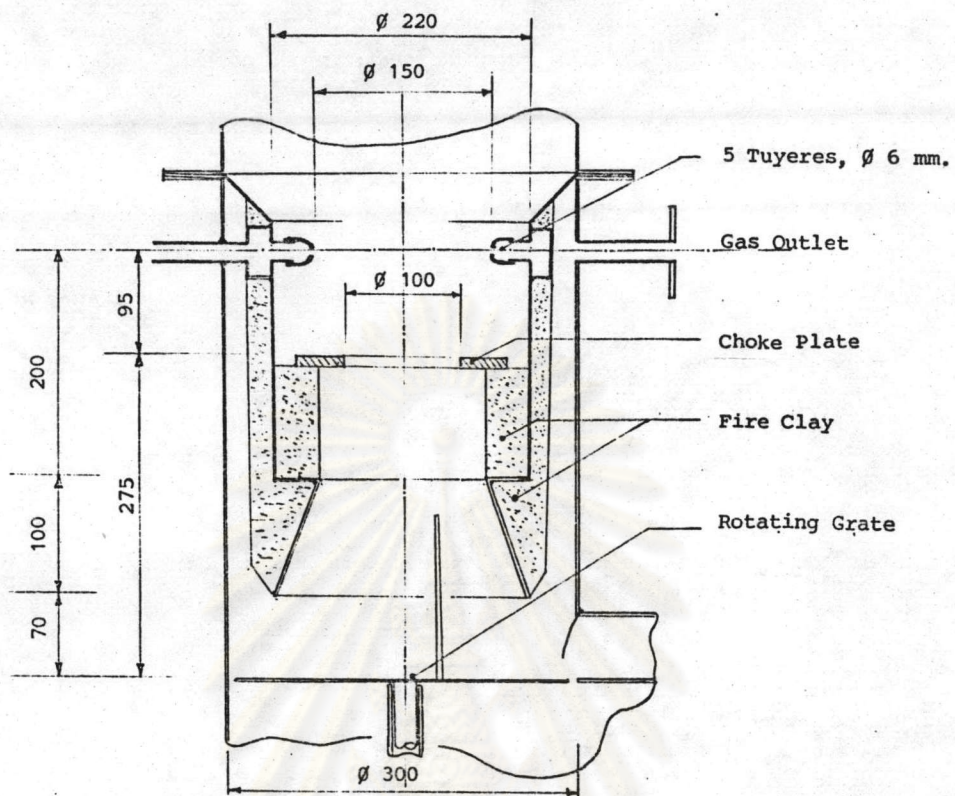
Combustion Zone of the Modified ME/CU II Gas Producer
